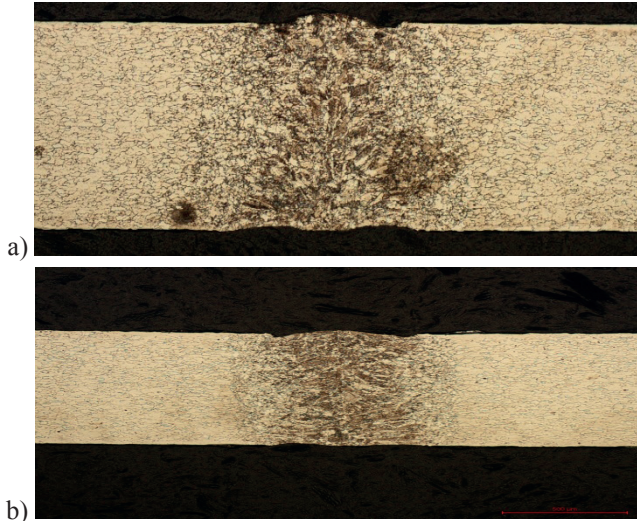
Cross sections of the bead-on-plate welds produced on the 0.8 mm thick electro-galvanized steel sheet DC04 by a disk laser at the same heat input of 15 J/mm, Table 3; a) bead B3 (750 W, 3.0 m/min), b) bead B9 (1500 W, 6.0 m/min)
